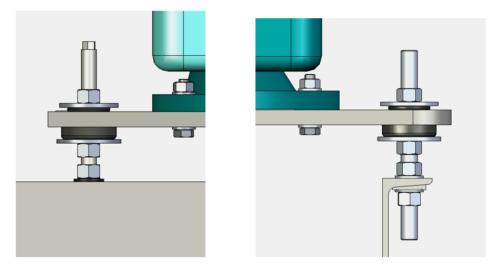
Connection of the Mixer to the Bridge (concrete bridge- left / steel bridge- right)
